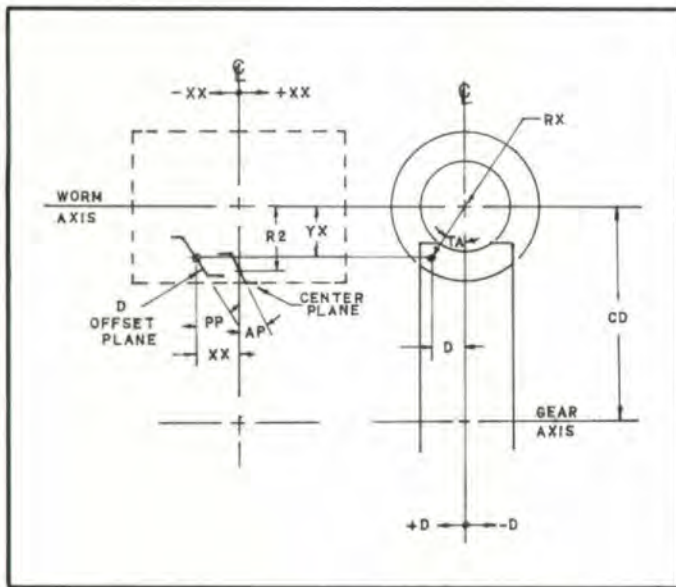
Diagram of geometry and dimensions on the worm and gear.
